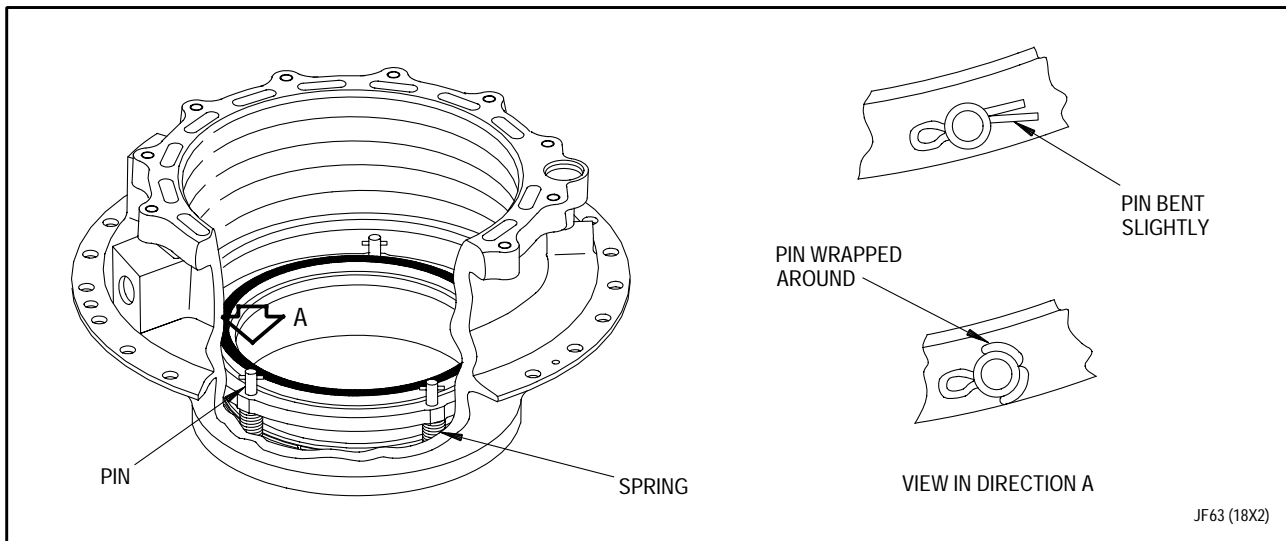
No. 1 Bearing Seal Face Assembly and Seal Ring - Seal Face Assembly Installation
